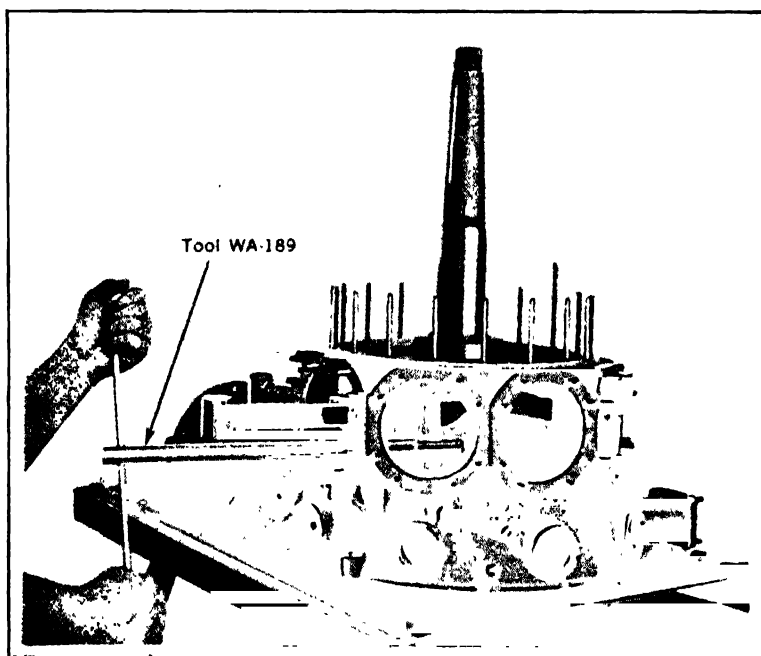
Removing Master Rod Bolts of Model J5 Using Tool WA-189.
